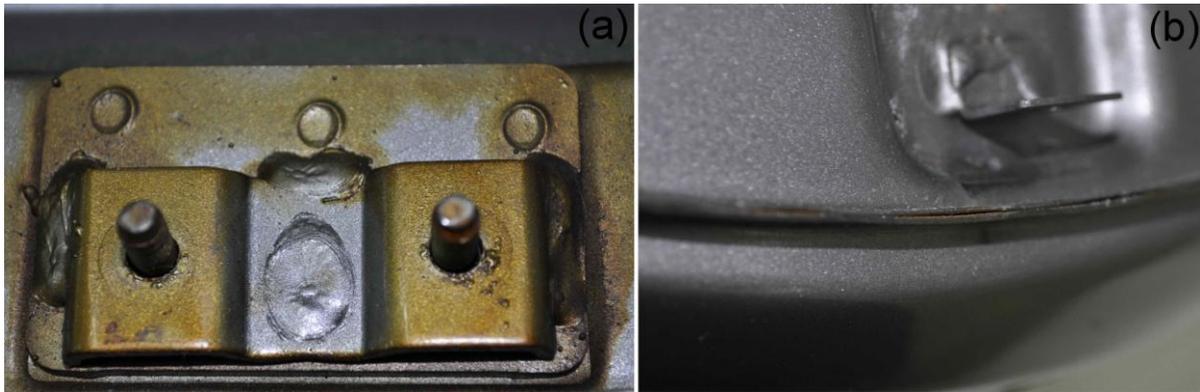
Fuel tank details; (a) Welding points on the failure area (b) Cracks on the circumferential seam welding line.
